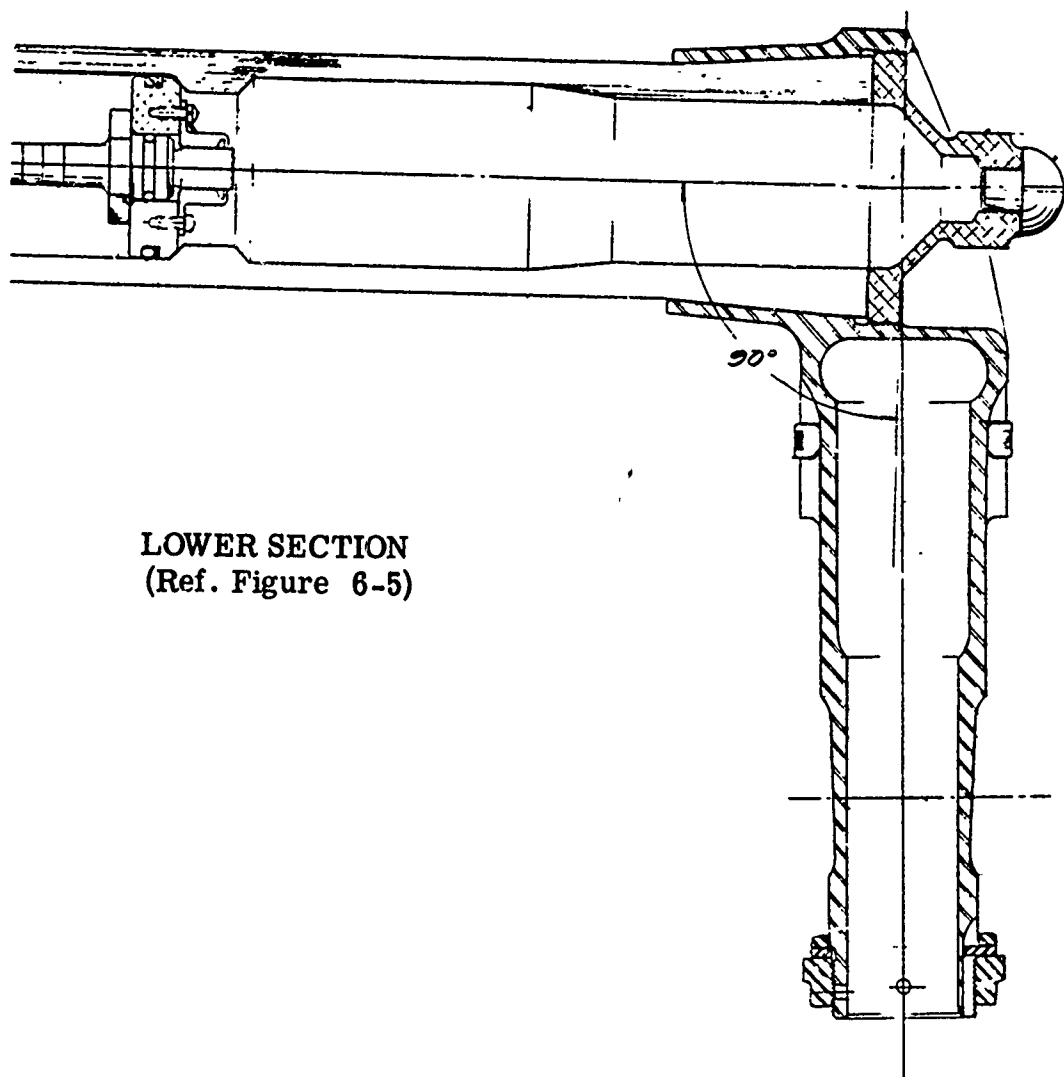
Enlarged Views of Shock Absorber Assembly
